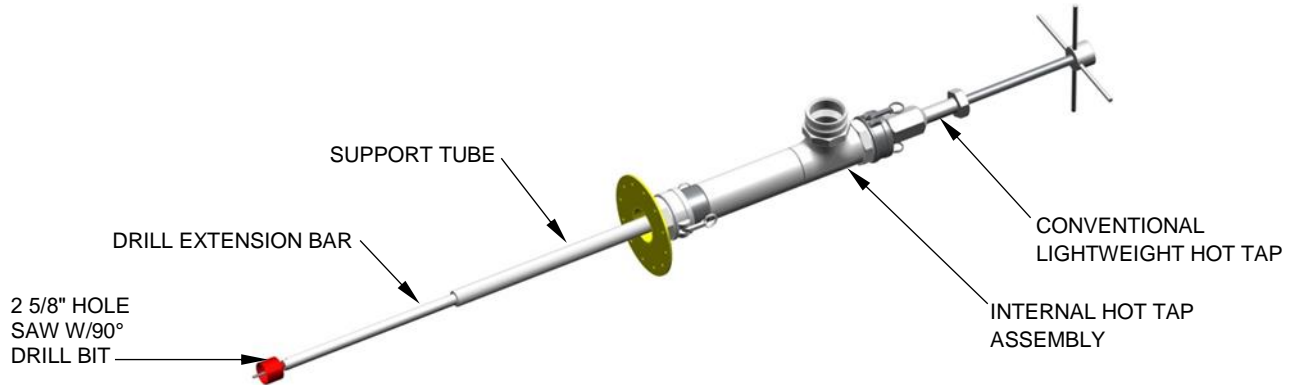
Prototype Concept for the Hot Tap Extension Tool
